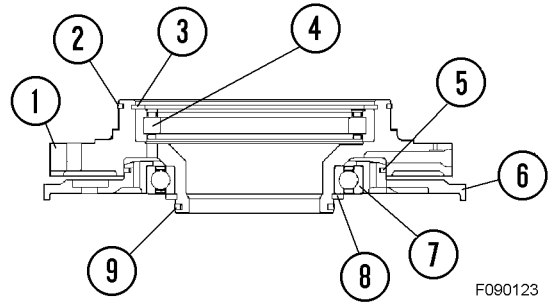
BEARING CAGE DISASSEMBLY
